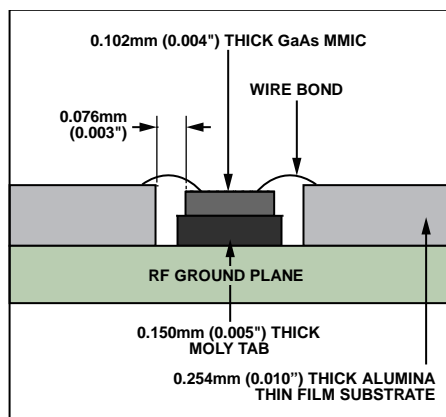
Die Attachment Using Molybdenum Heat Spreader
